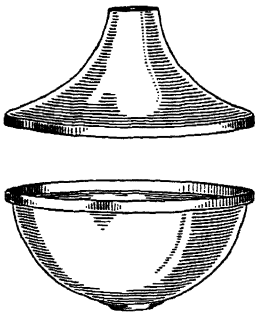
Parts for lamp body. See Fig. 232 for assembly. Upper: brass cone; lower: brass half shell
